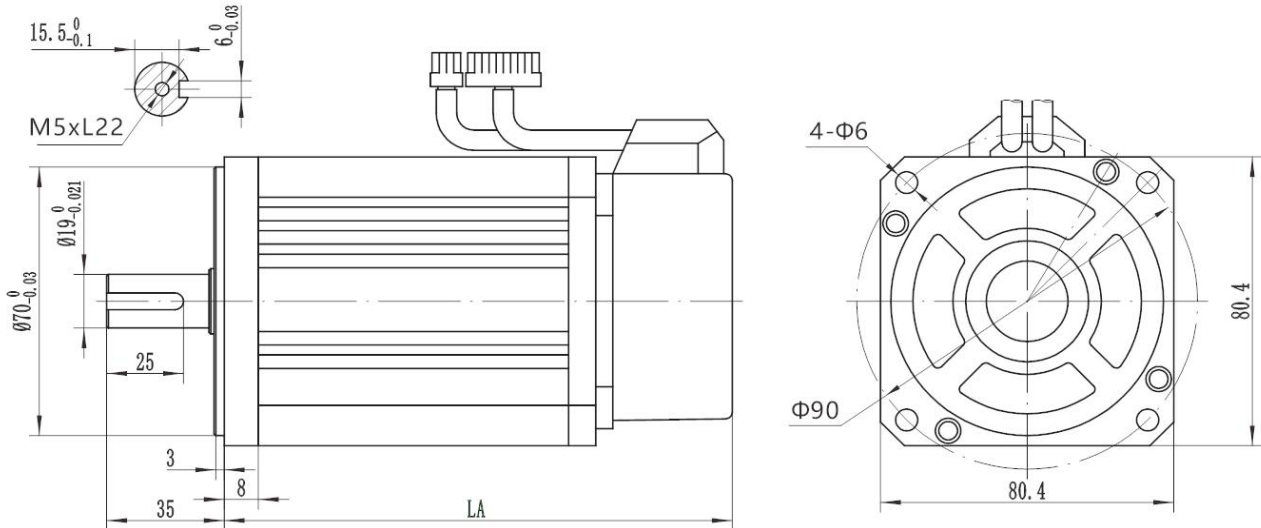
Installation dimension drawing of WE series 80 flange servo motor
